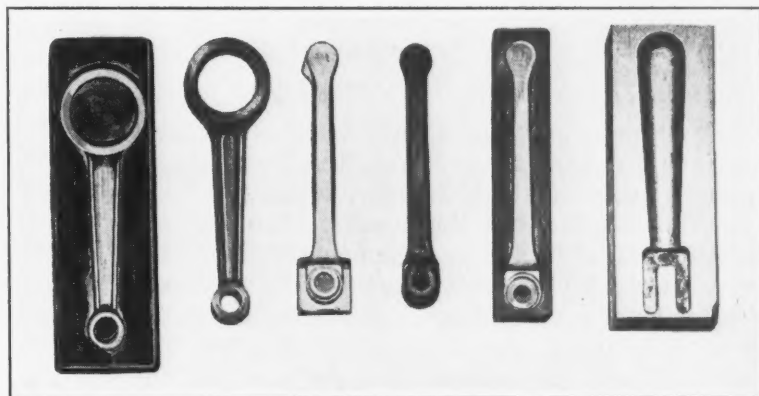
Examples of Dies with Cavities Engraved on Machine Shown in Fig. 2, Using a Model the Same Size as the Work
